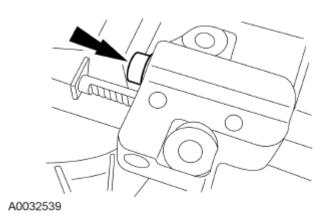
Locating Timing Chain Tensioner Plunger Courtesy of FORD MOTOR CO.
